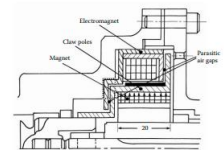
Improved claw pole actuator assembly. (Courtesy of Delphi Corp.)
